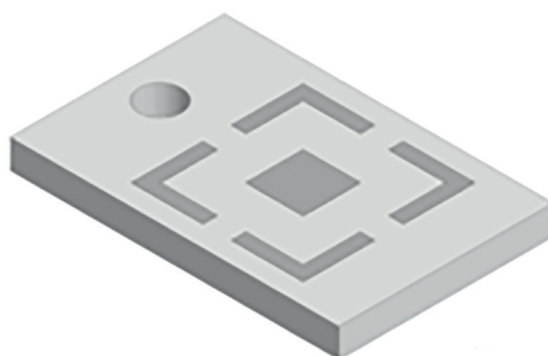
The sample on which the MAO coating and metal contacts were sprayed
